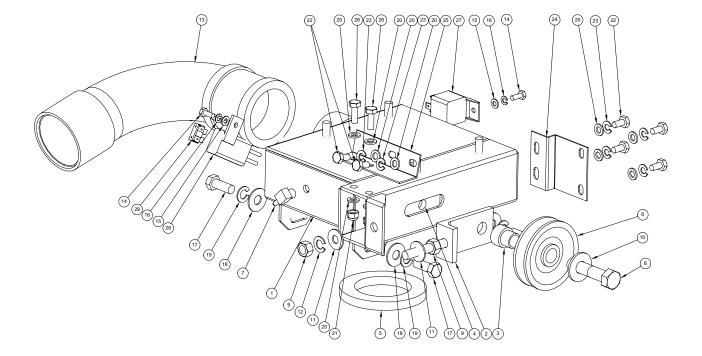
Pump - Hydra II - Assembly D-5906 Rev -
